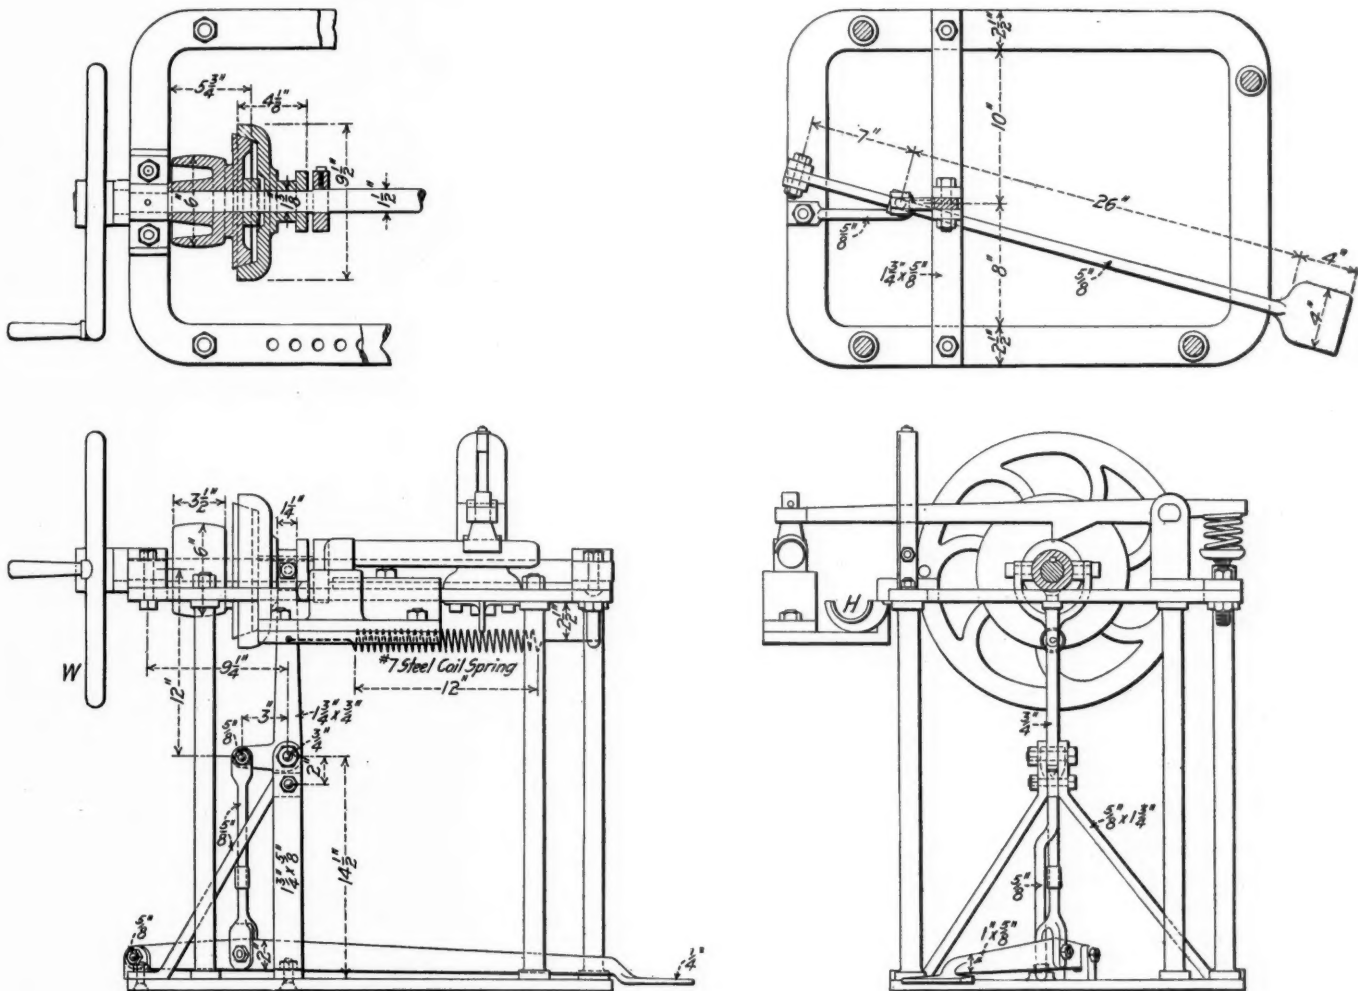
Tube Welding Machine Arranged for Power Drive.
